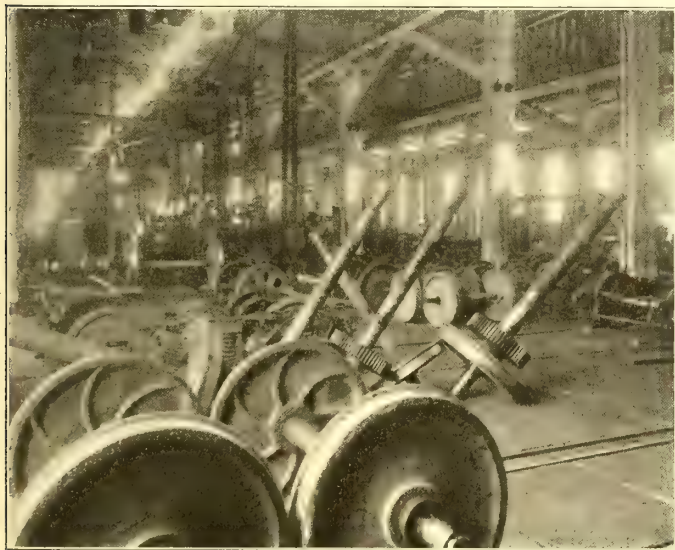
MACHINE SHOP, MACHINE TOOL SIDE
